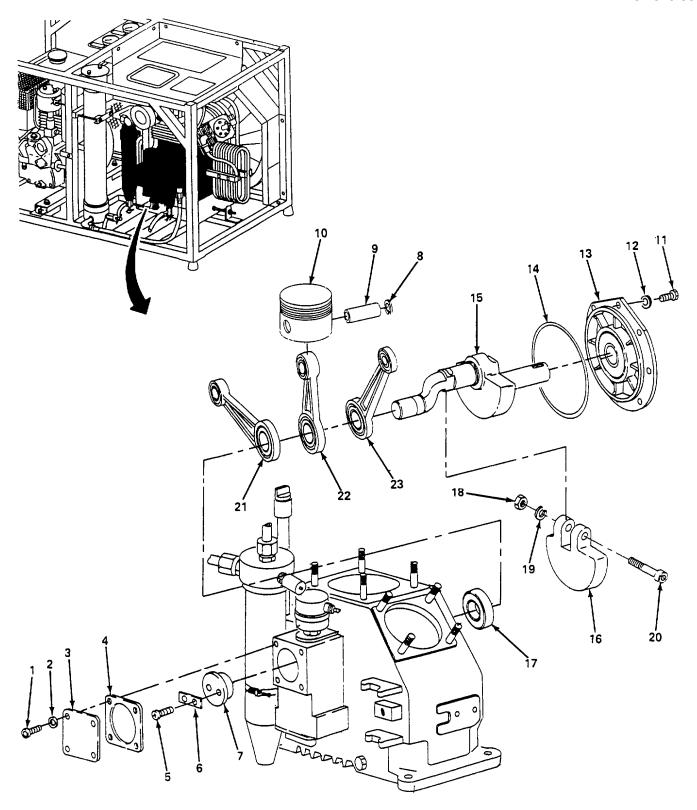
First Stage Piston and Piston Rod Assembly, Replace.
